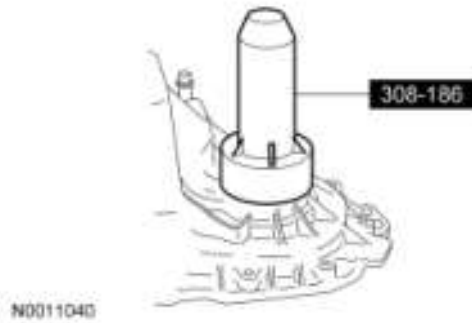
Installing Oil Seal Using Special Tool (308-186)
